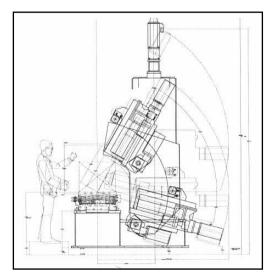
The Arch Type Reconfigurable Machine Tool [36]
